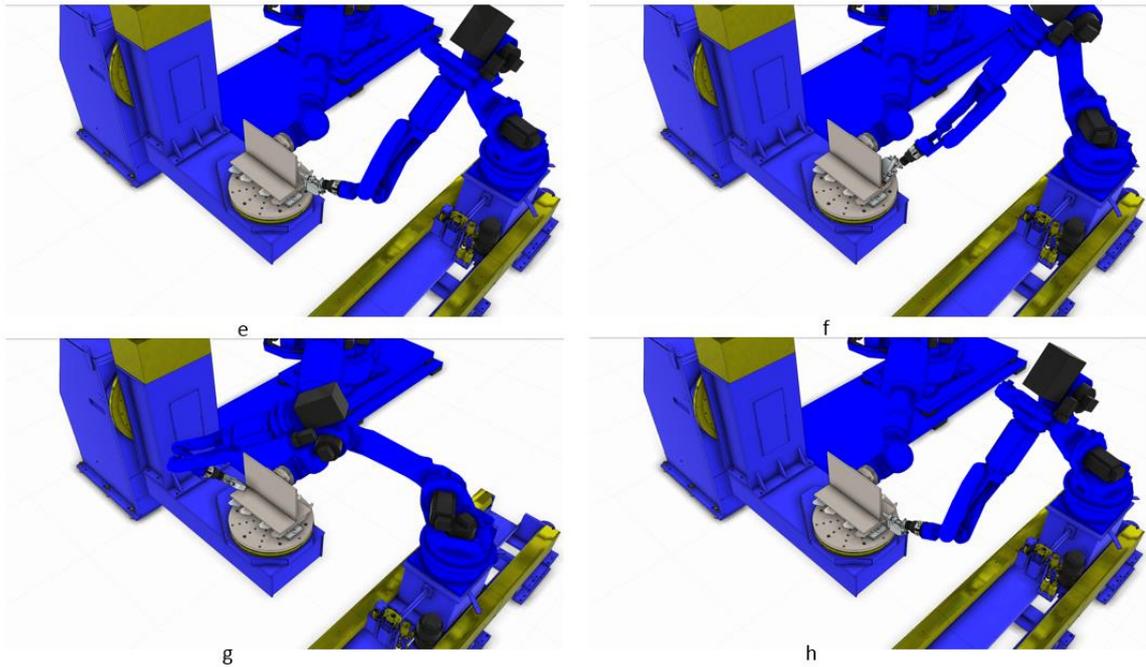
Phases of simulation continues. E) joint geometry inspection, f) tack welding, g) tack welding from other side and h) inspection of joint geometry again.
